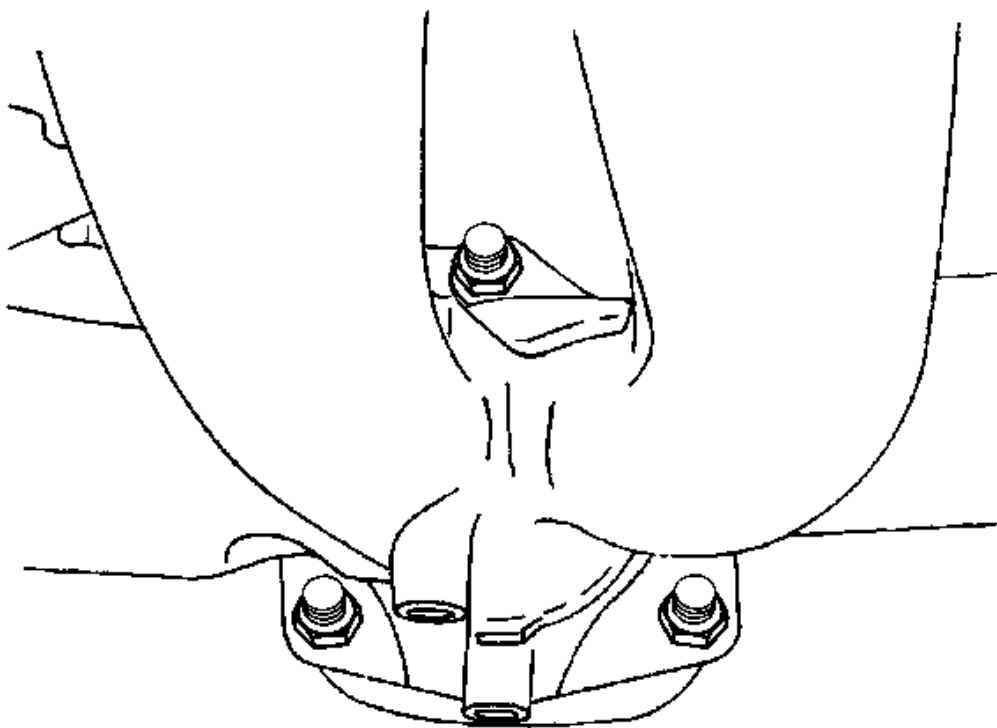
Locating Auxiliary Catalytic Converter Upper Flange Nuts
